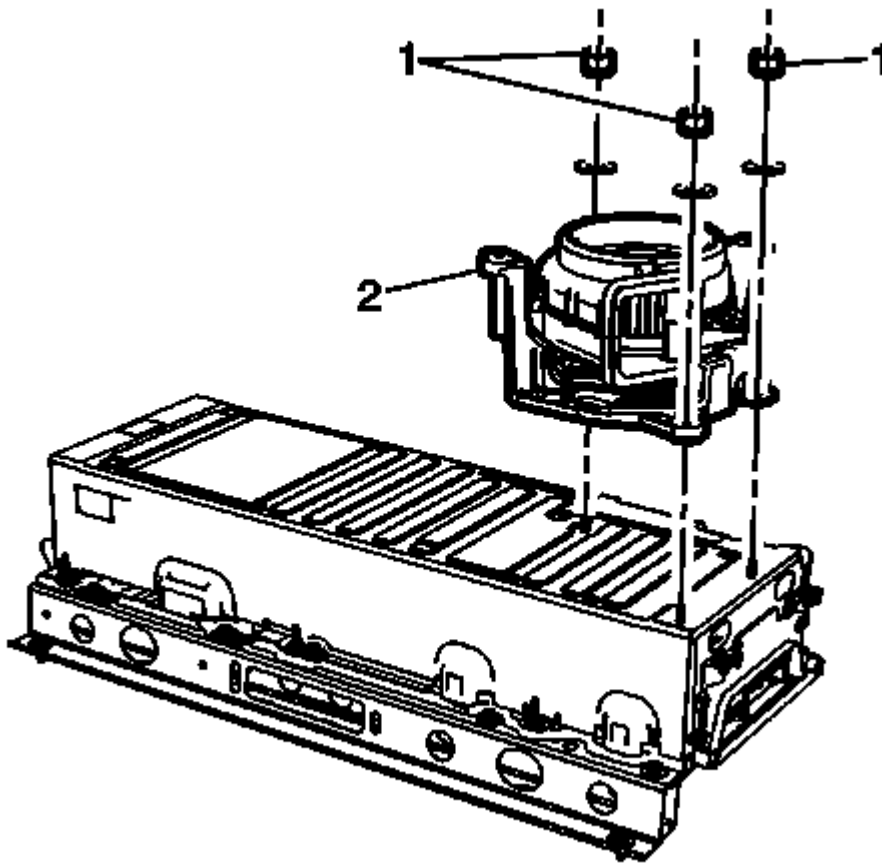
Drive Motor Battery Cooling Blower Assembly
